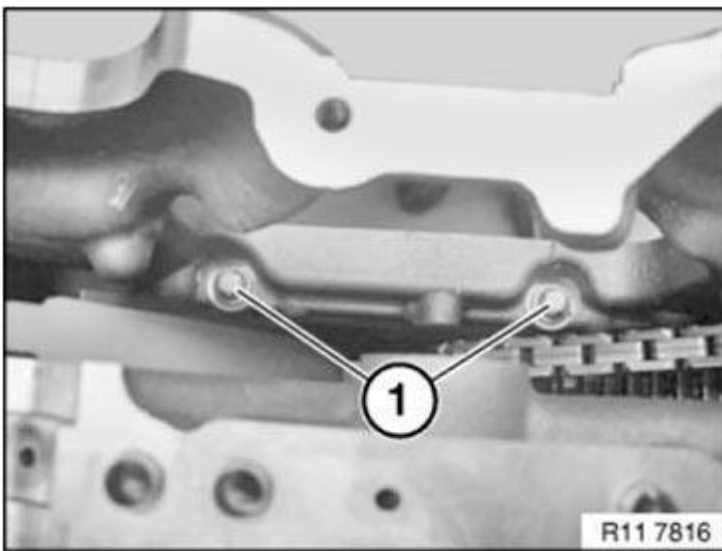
Identifying Bolts Between Cylinder Head And Timing Case Cover
